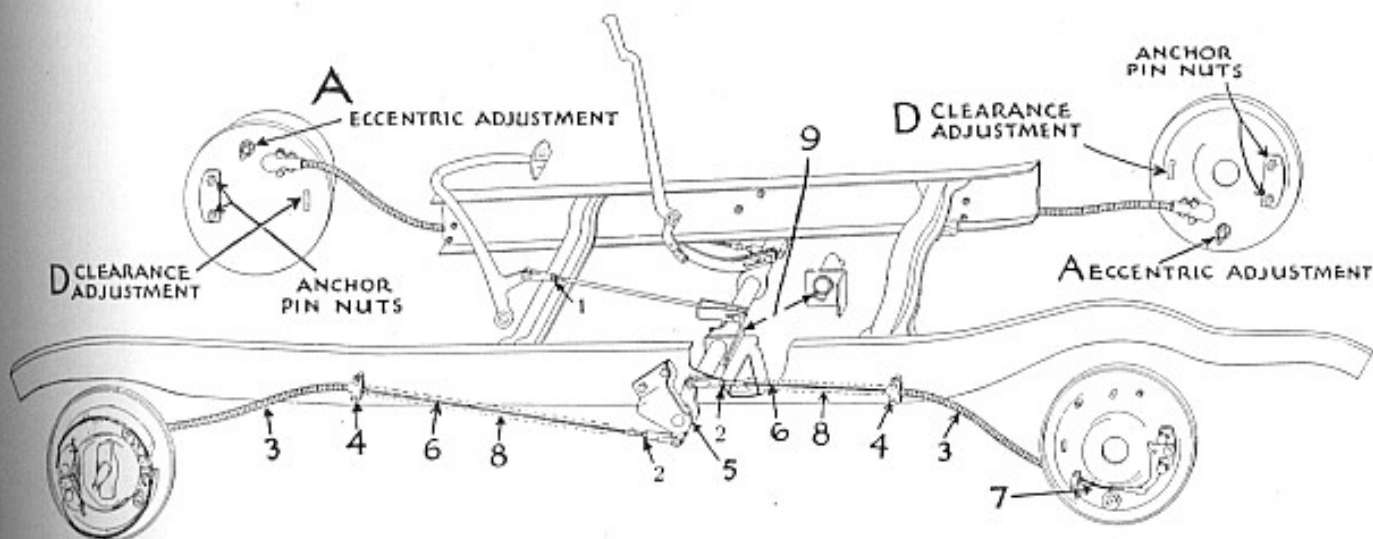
Typical chassis linkage hookup using cable type controls. Dotted lines indicate section of cable which is in conduit during lubrication
